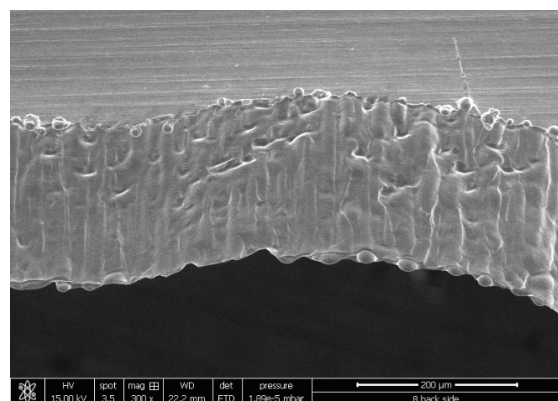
SEM detail picture of the cut zone of the lower surface (sample 1, test 6)
